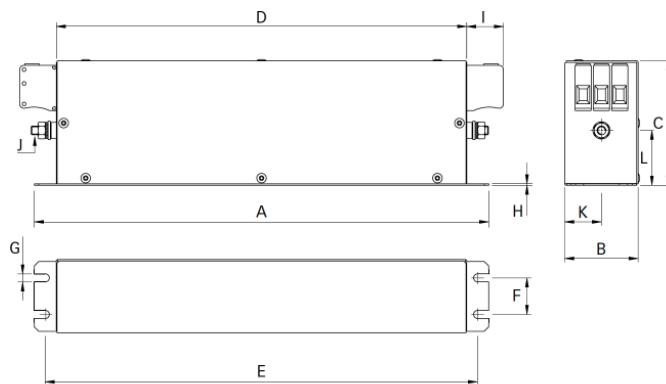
Dimension drawing of FN 3258 series filters (unit: mm)
